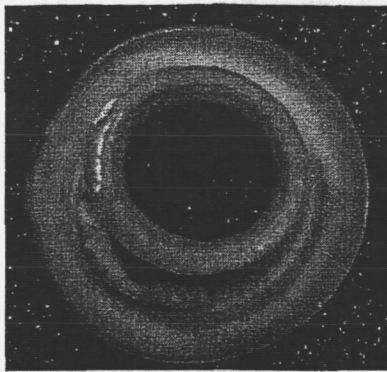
Fracture/void located along the outer diameter (at 7 o'clock) of an extruded pilot seal removed from thruster S/N 101, fuel valve S/N 544. The inner (hole) diameter is 2.8 mm (0.11 in.).
